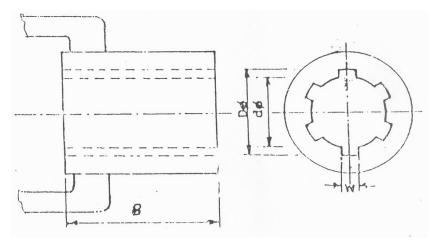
Propeller Shaft Insert Dimensions, (mm)
